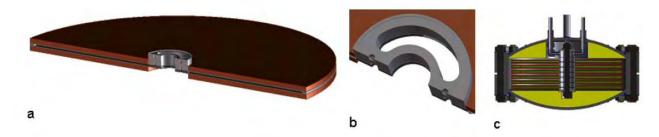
(a) Sandwich plate-cross section of the sandwich plate + metal foam, (b) detail of the heat transfer channel, and (c) brazed plates assembled [100]
